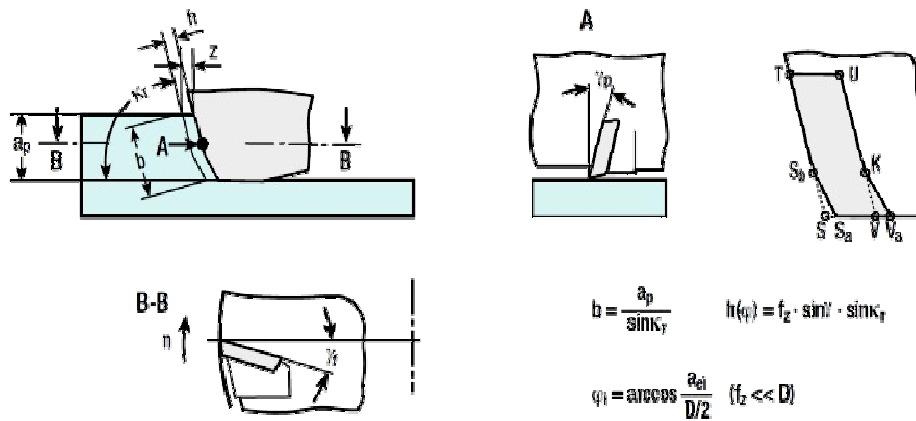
Contact conditions and cutting edge geometry in face milling [4]
